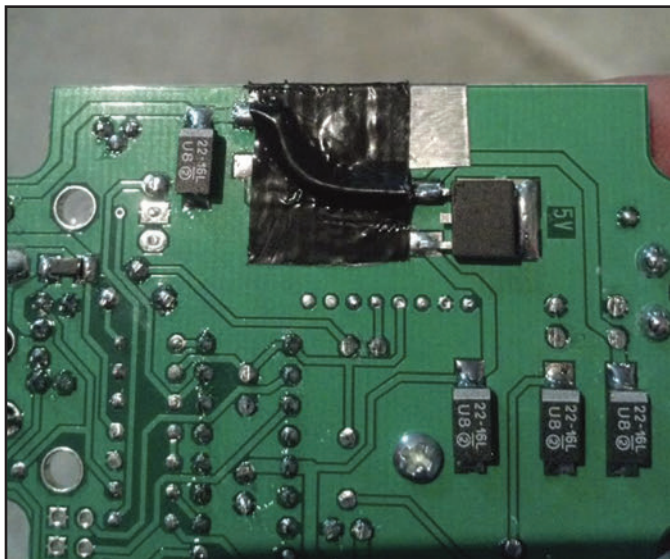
Underside of printed circuit board showing the MT-RTG 7812 removed and jumpered.
